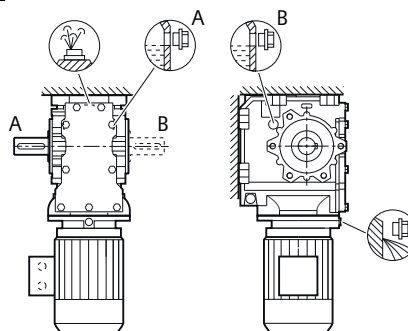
Mounting positions for helical worm gearbox C. foot-mounted design, size 29
